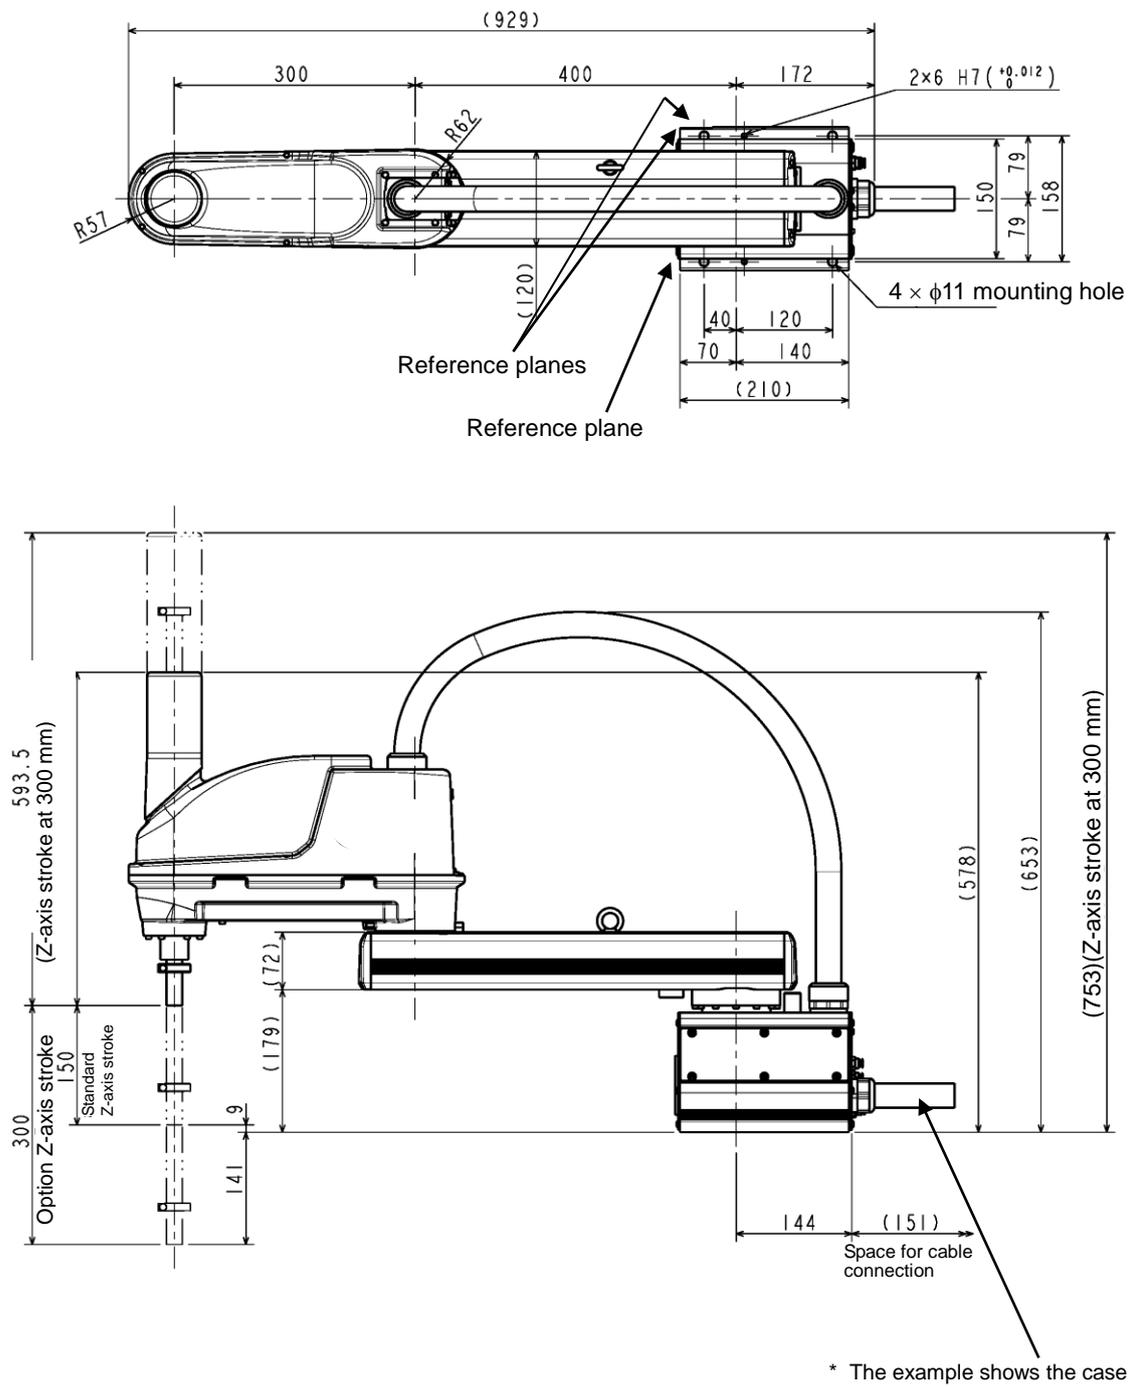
Outer dimensions of the robot (KHL-700NSCN)
